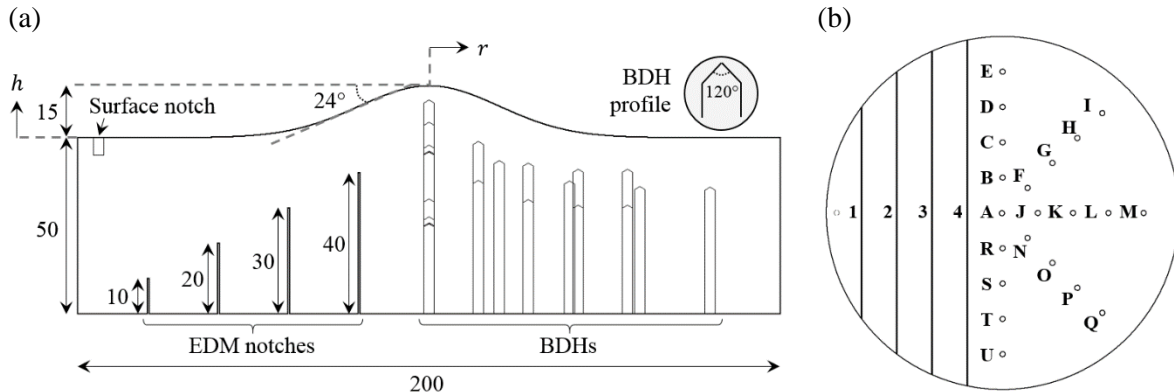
Illustration of the designed specimen with machined defects. (a) shows the side profile and (b) shows the base view with the defects labelled. Units in mm.
